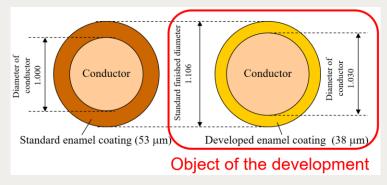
Cross-sectional view of enamel wires for small- and medium-sized rotating machines
